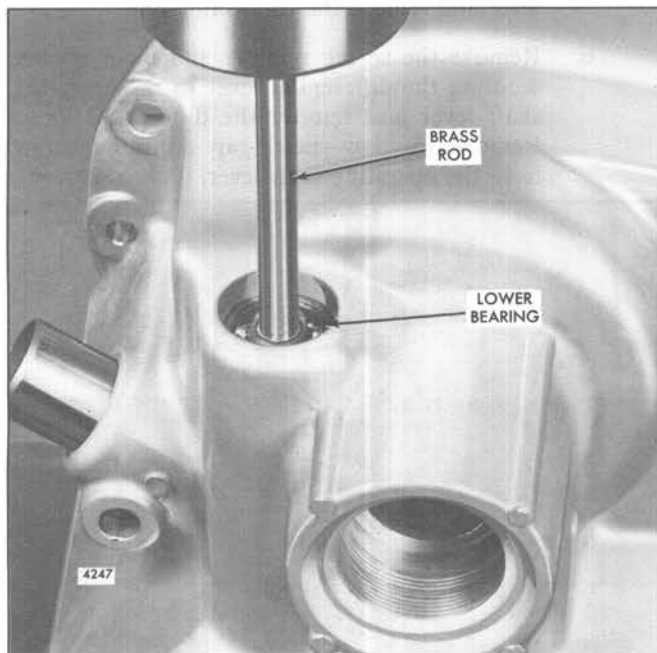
Removing Operating Shaft from Operating Shaft Lower Bearing
